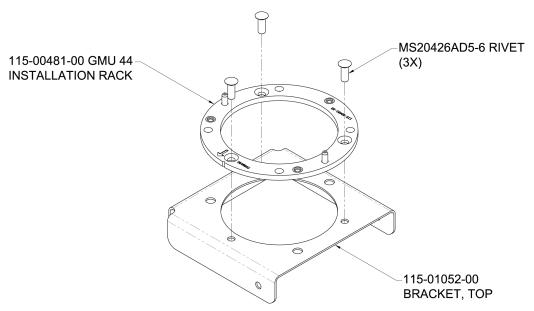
Lancair IV/IV-P GMU 44 Mounting Bracket
